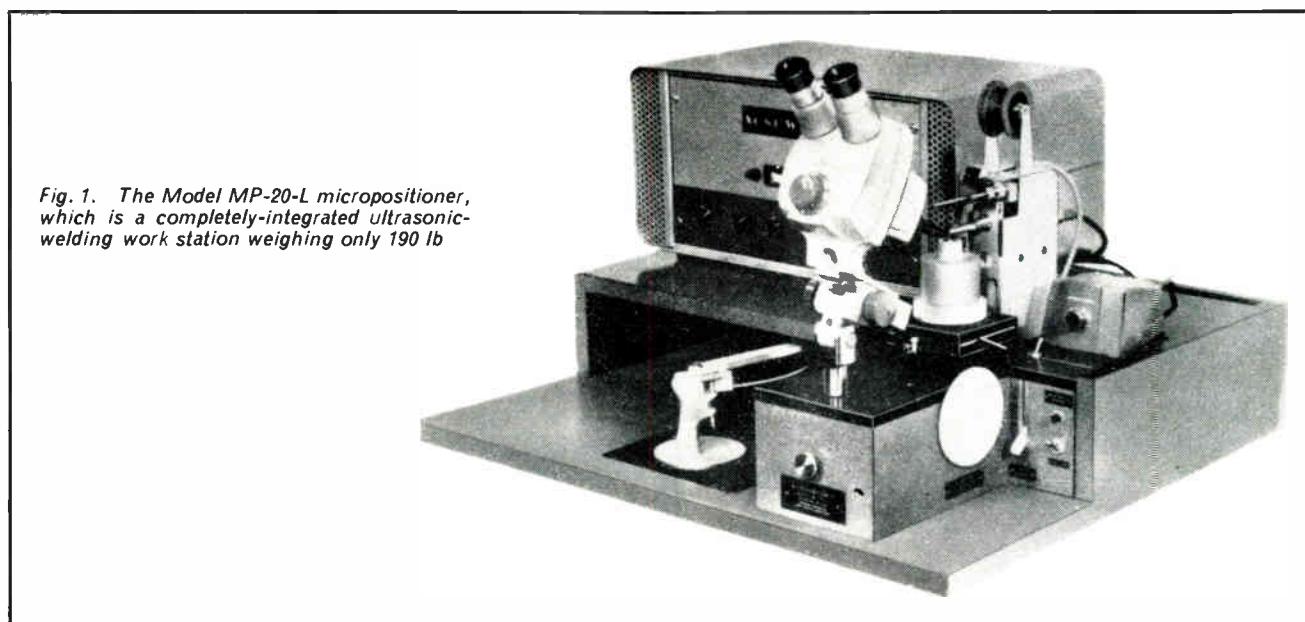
The Model MP-20-L micropositioner, which is a completely-integrated ultrasonic-welding work station weighing only 190 lb
